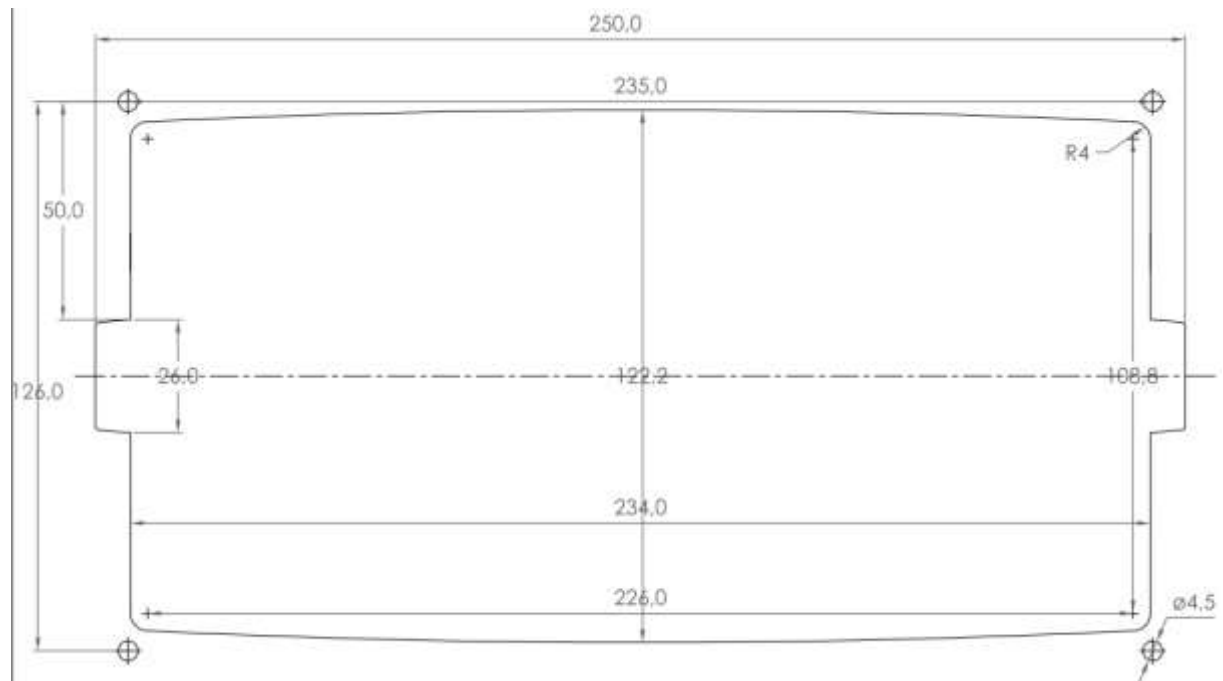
R5 SUPREME CDU Mechanical Drawing (mm)
